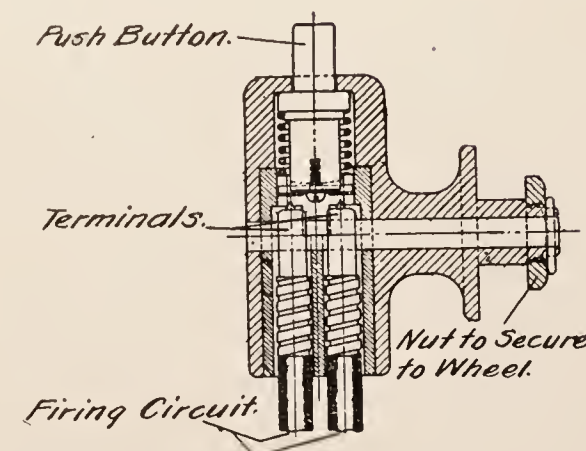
Push-Button Type of Firing-Handle Used on Two-Handed Drive-Wheels.
